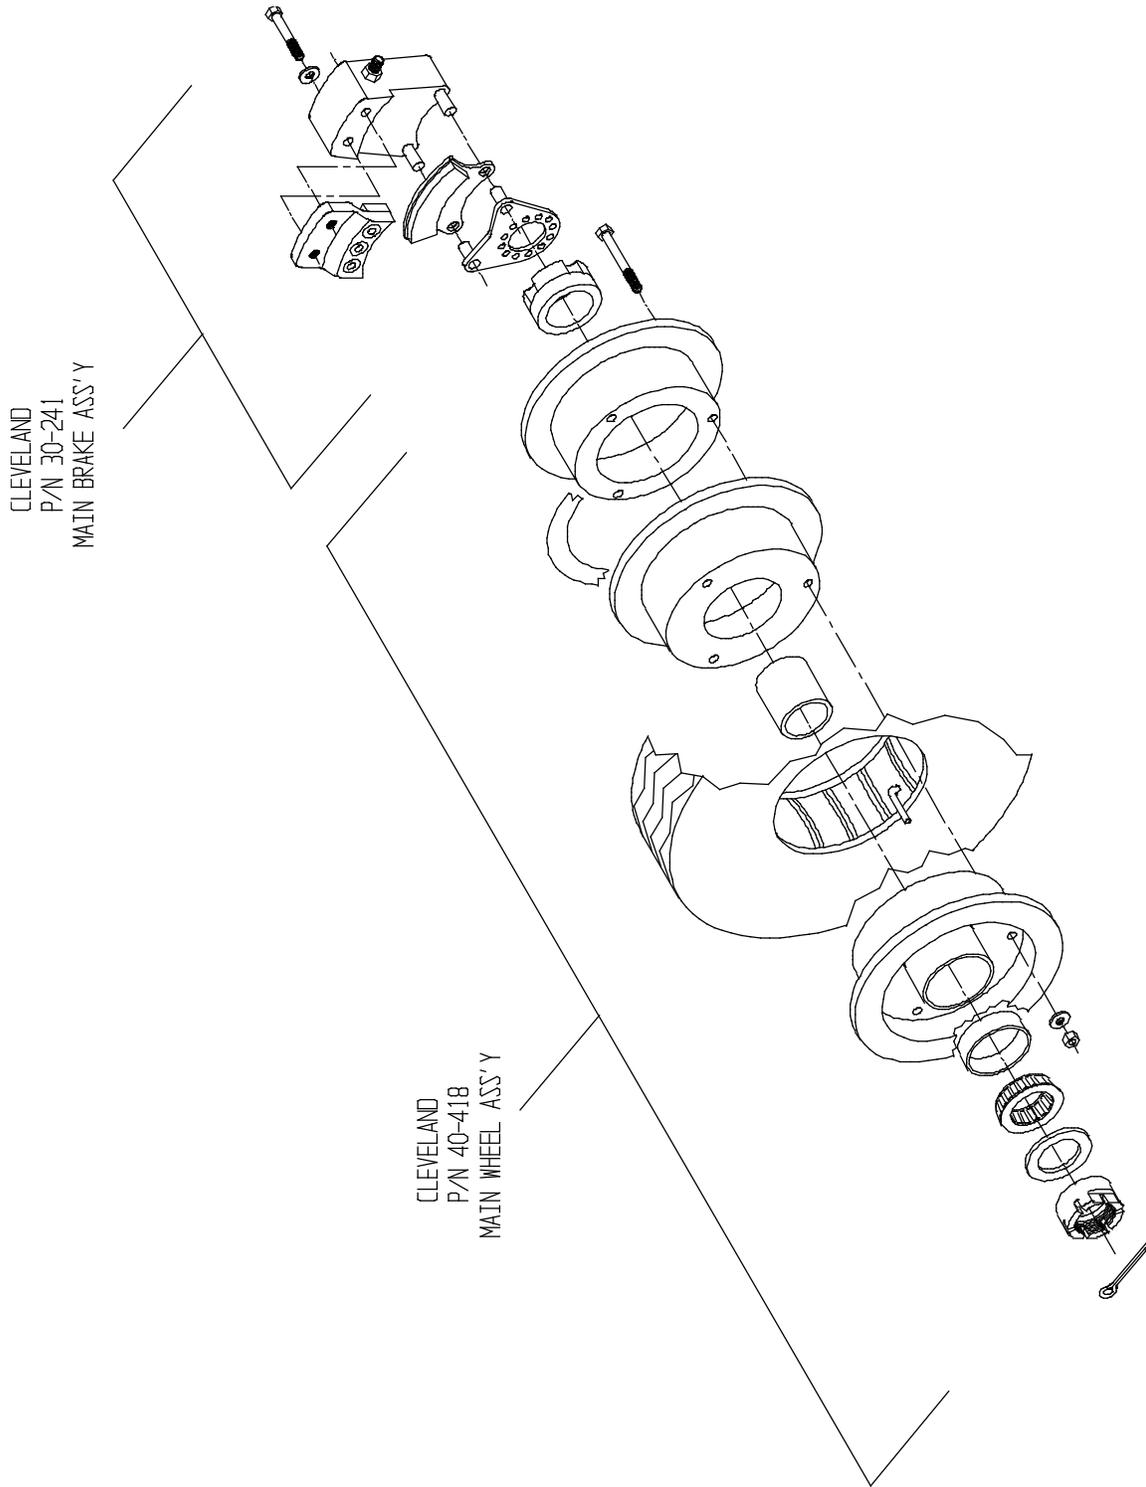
MAIN GEAR WHEEL ASSEMBLY
